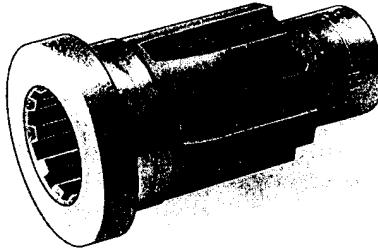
Sprocket Shaft Engine Rotation Tool
